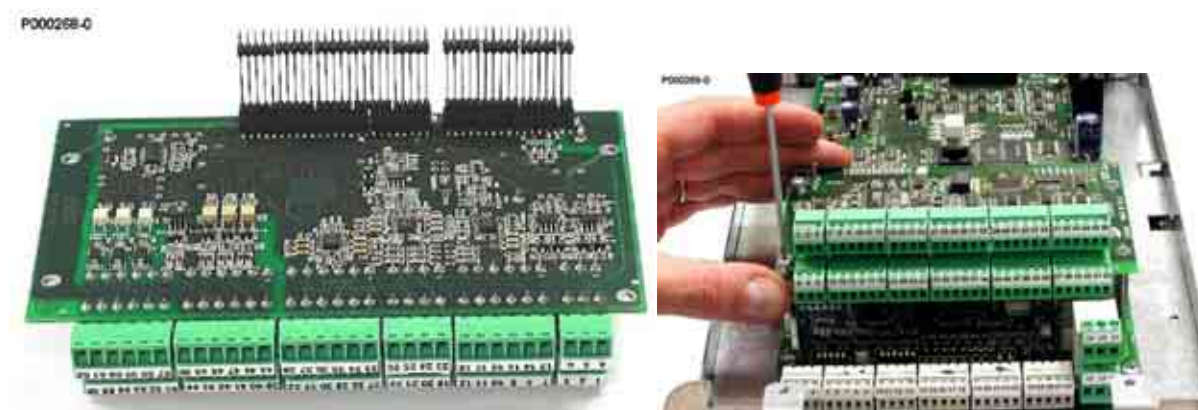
Fitting the strips inside board ES847 and fixing the board on slot C
